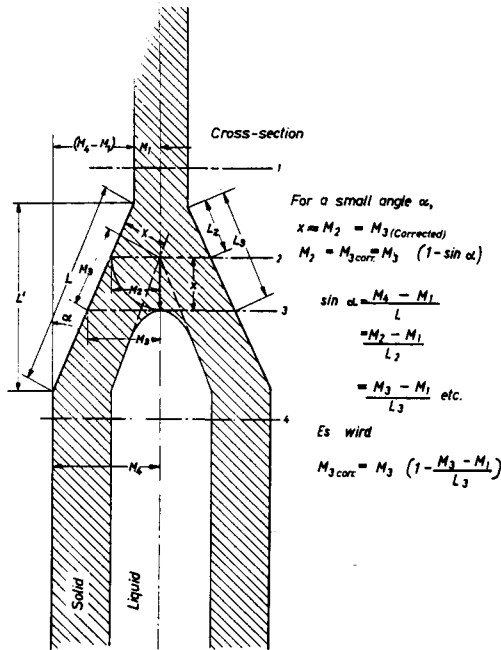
Solidification plane of a wedge plate with cooling fins. Solidification geometry after Chvorinov⁽¹⁾.
